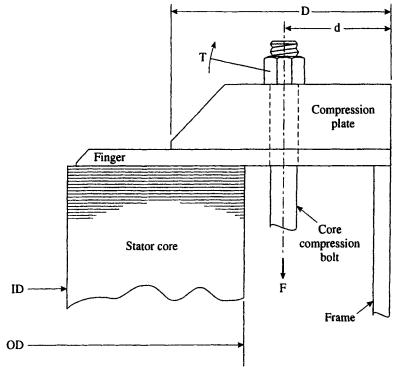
[S08] Schematic arrangement of the core-compression hardware of a typical many-pole machine.
